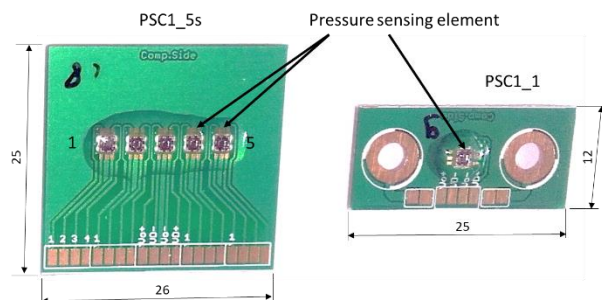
Printed circuit boards with small pressure sensors. Left: type PSC1\_5s with array of 5 sensors; right: type PSC1\_1 comprising single sensor. Picture shows dry side of the sensors. Dimensions are given in millimeters.
